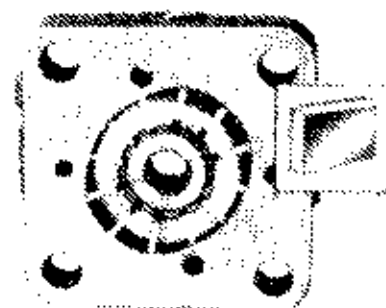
Pump rotor vanes should be installed with beveled edge outward.
